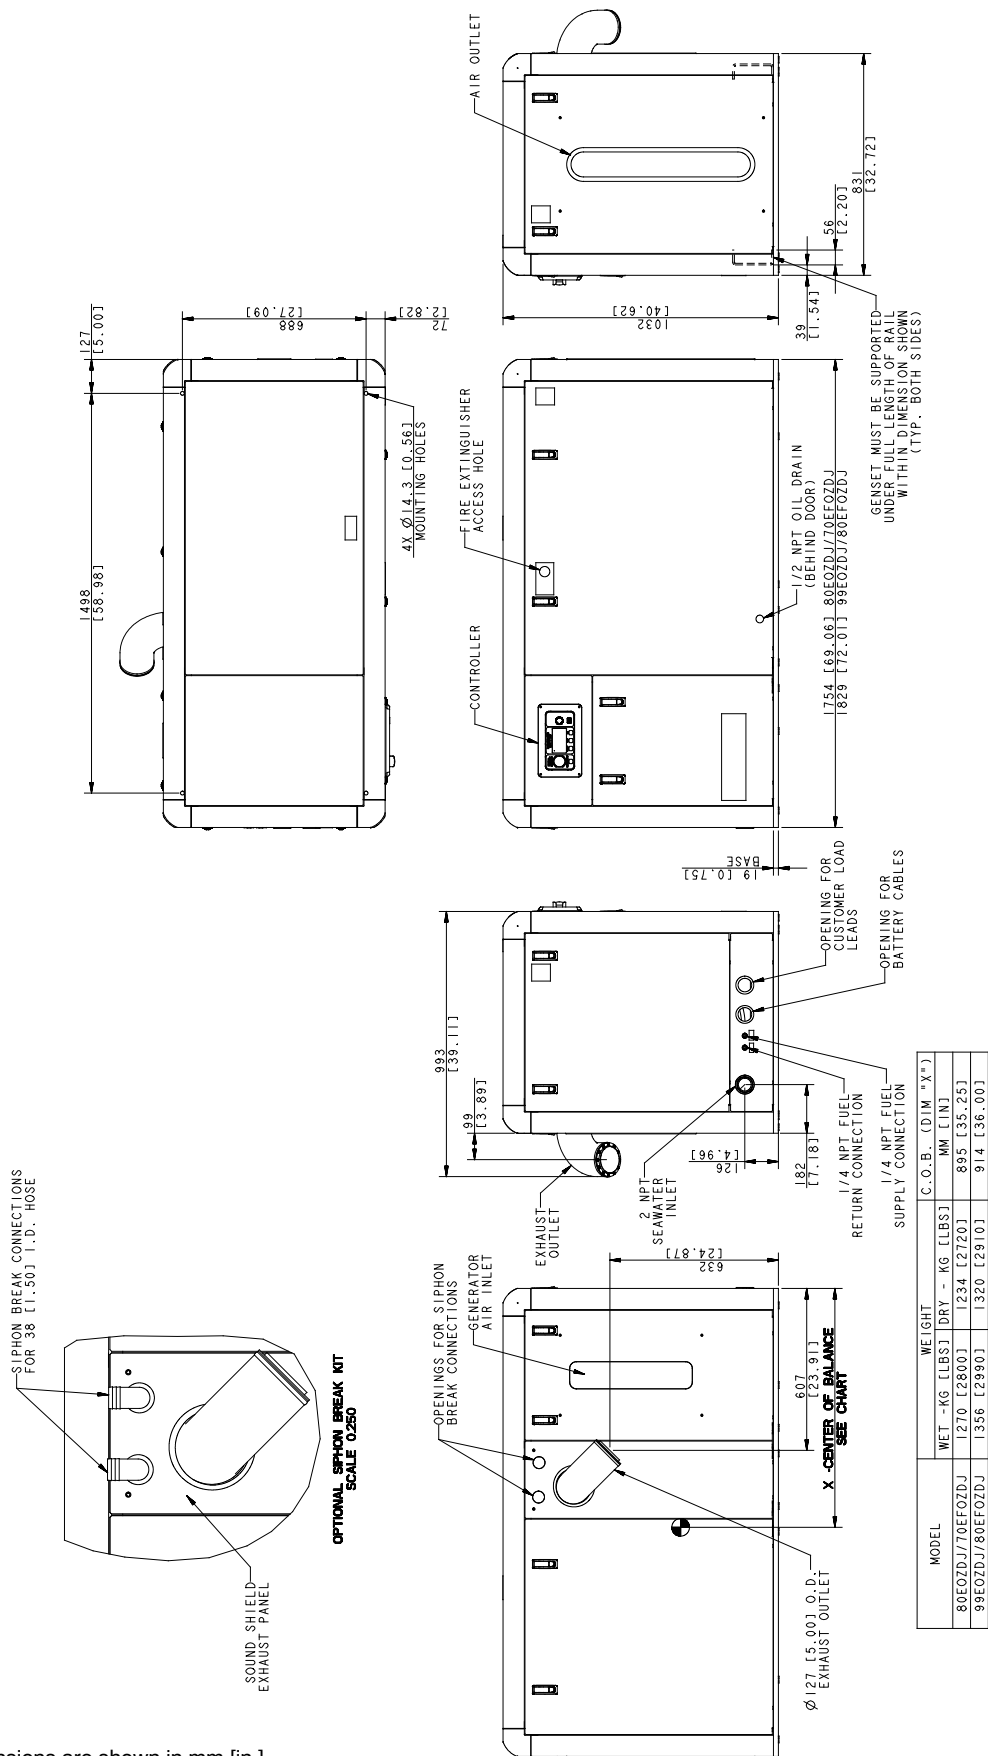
Dimension Drawing, 80/99EOZD(C)J & 70/80EFOZD(C)J (Open Unit Sheet 1 of 2)
